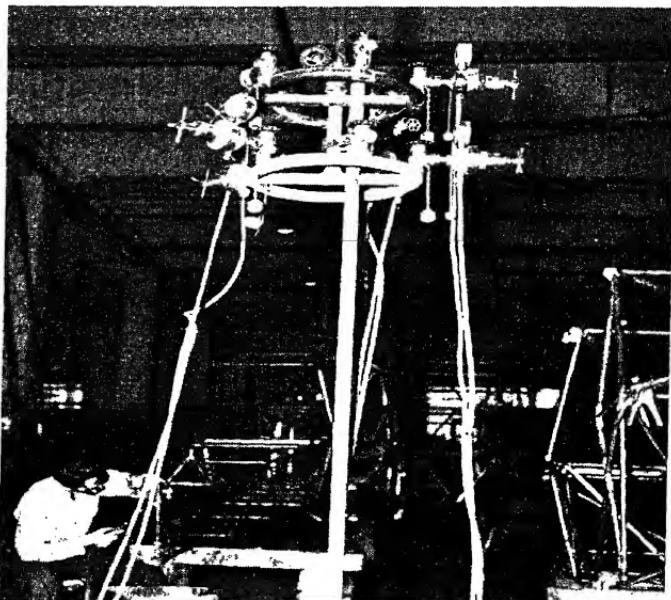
Stand to hold gas lines out of the welder's way.
